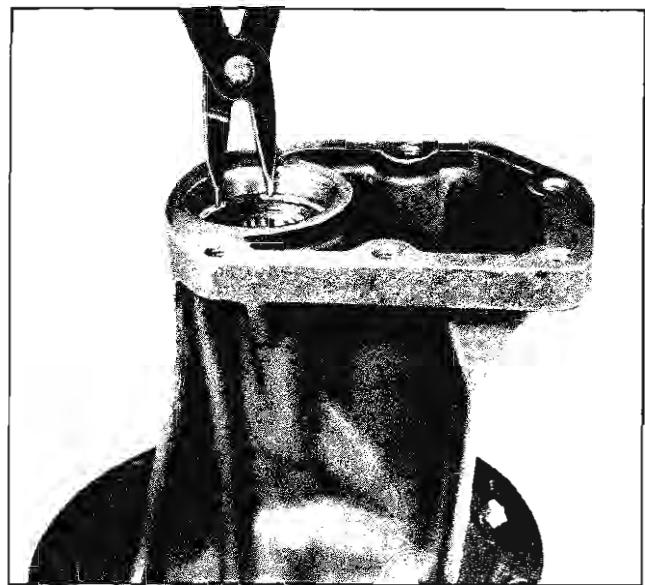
A-47 Removing Bearing Retainer Ring (V-8)
